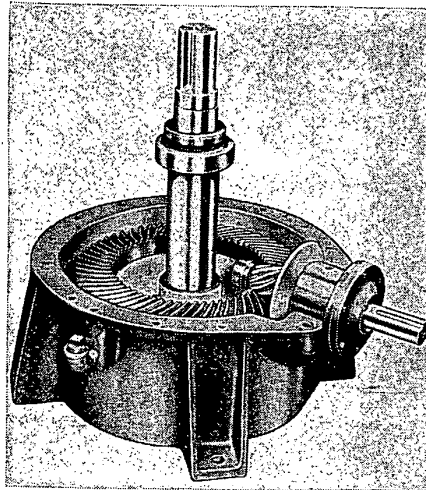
Bevel-gear speed reducer. (Courtesy of Philadelphia Gear Corp.)
